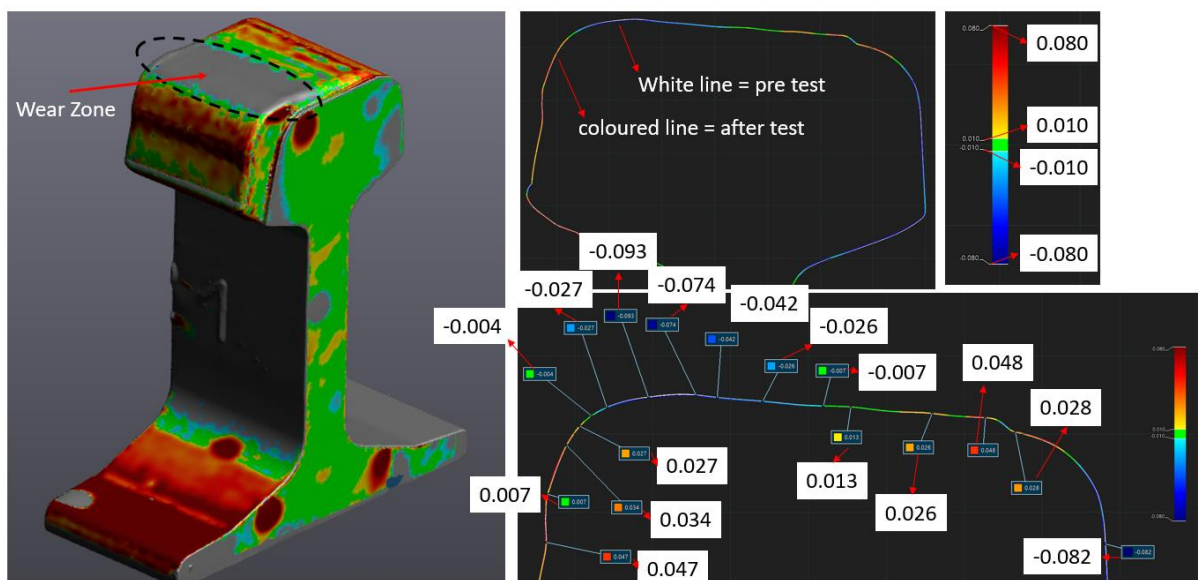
Un-clad R260 pocket surface profile measurements: a) profile measurements by 3D laser scanner; b) profile measurement by Calipri before and after 5,000 cycles (green line refers to before test and blue colour to after test).
